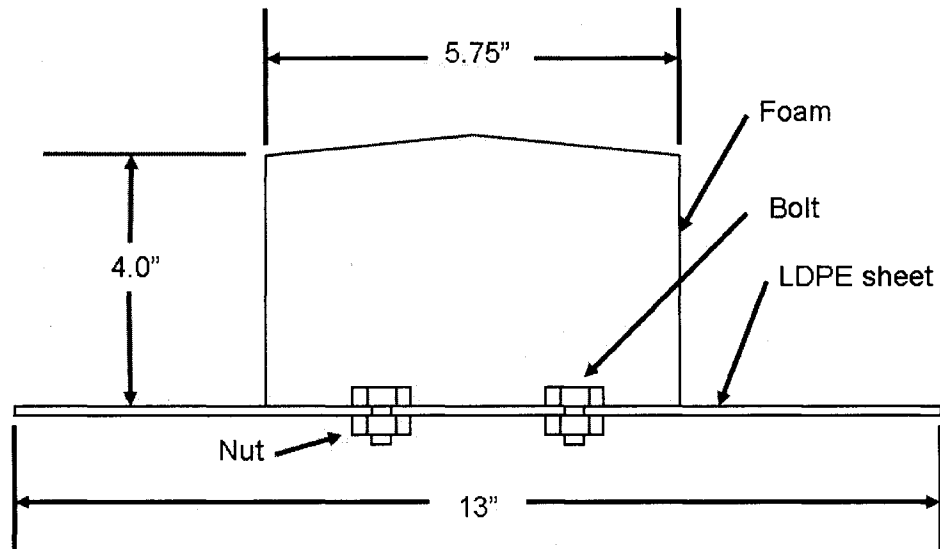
Cross-section sketch showing the construction detail of the house.
